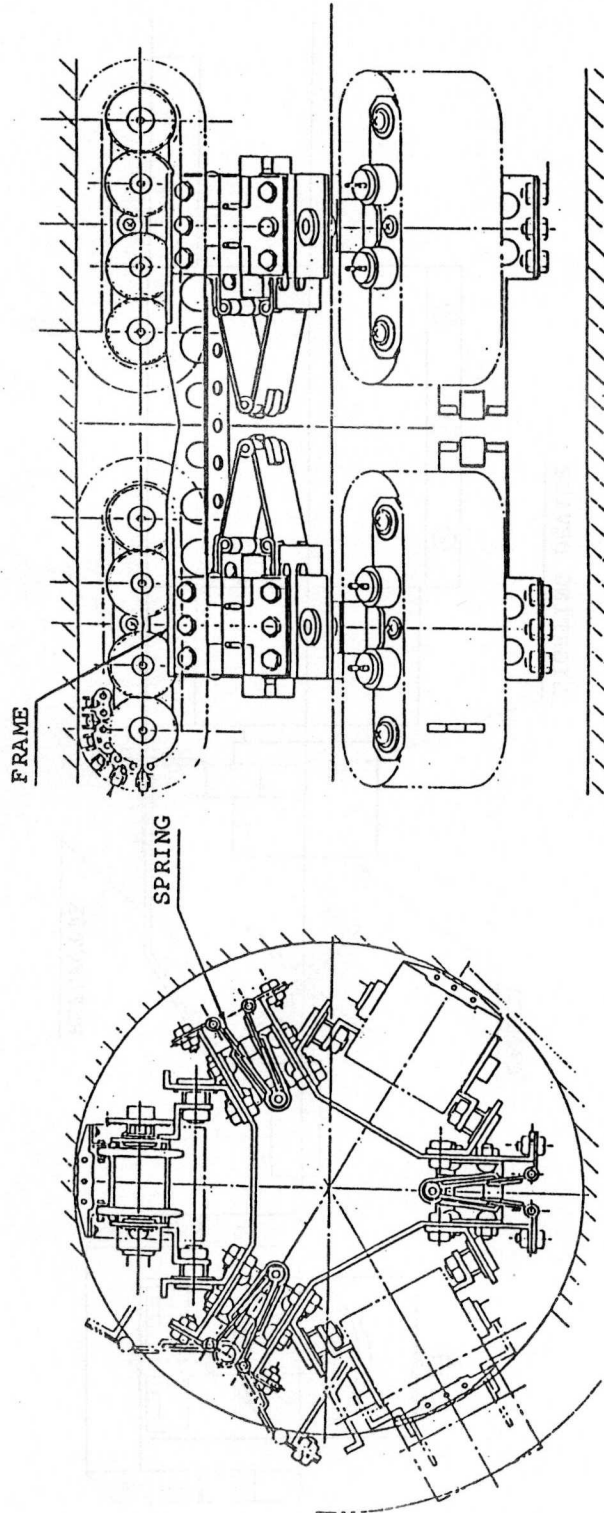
OUTLINE OF INSPECTION ROBOT TRAVELING SECTION
